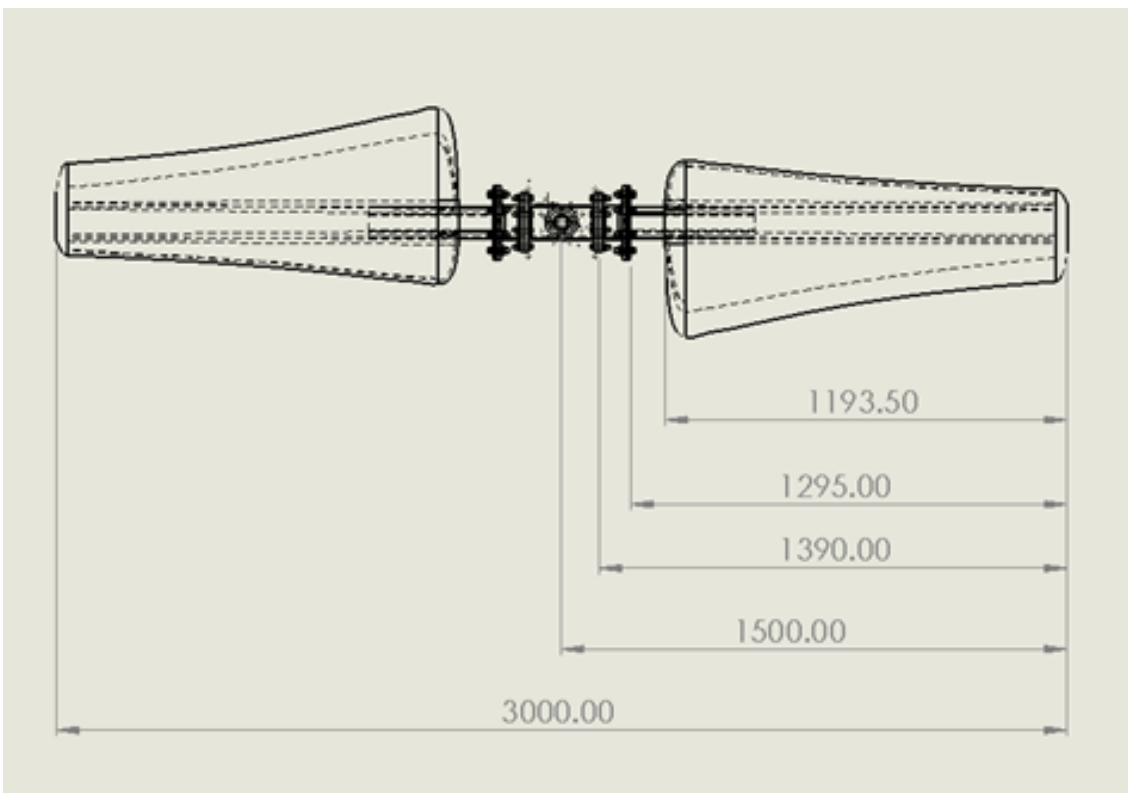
Drawing of the RRES blade and hub assembly with key dimensions (mm).
